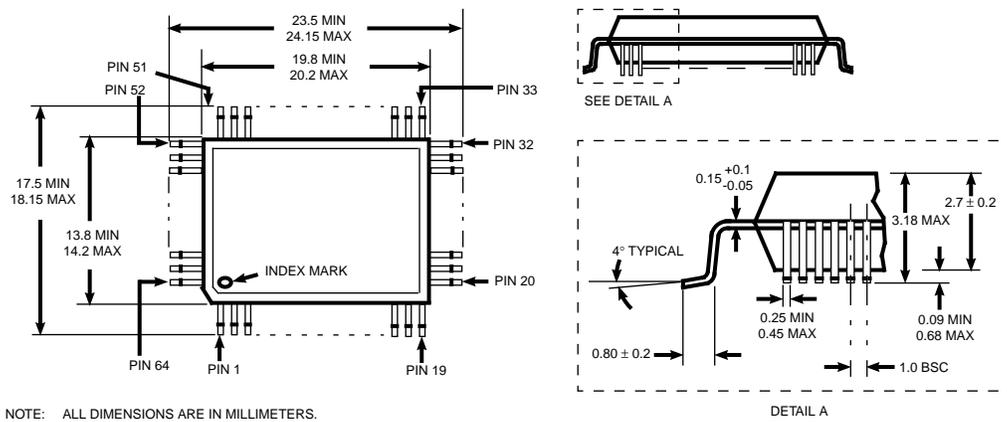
FAS209 64-Pin PQFP Mechanical Drawings
